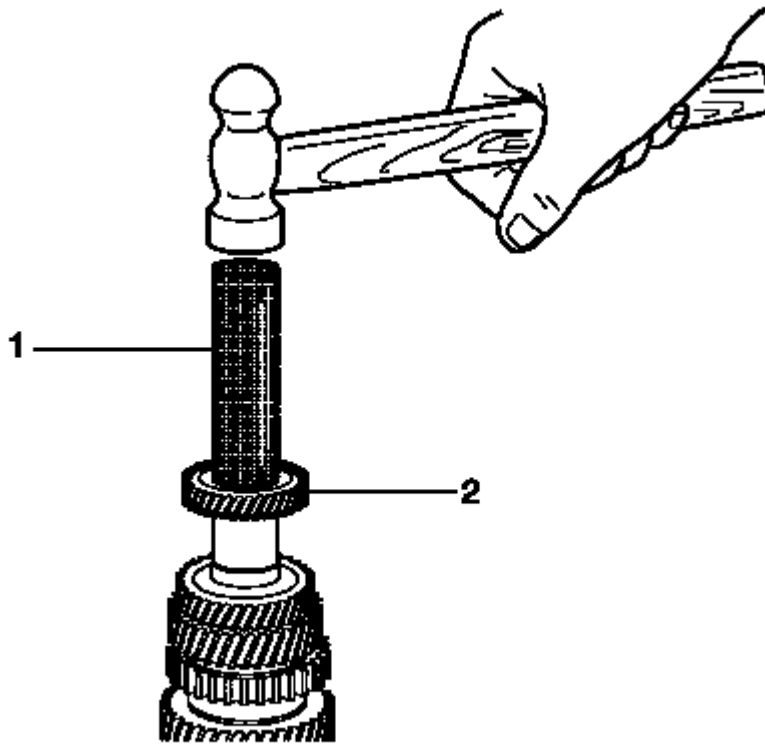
Installing 4th Gear Using DT-49080 Tool
